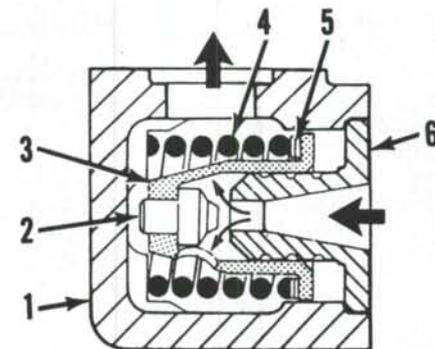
Sectional view of hydraulic oil pressure relief valve.
